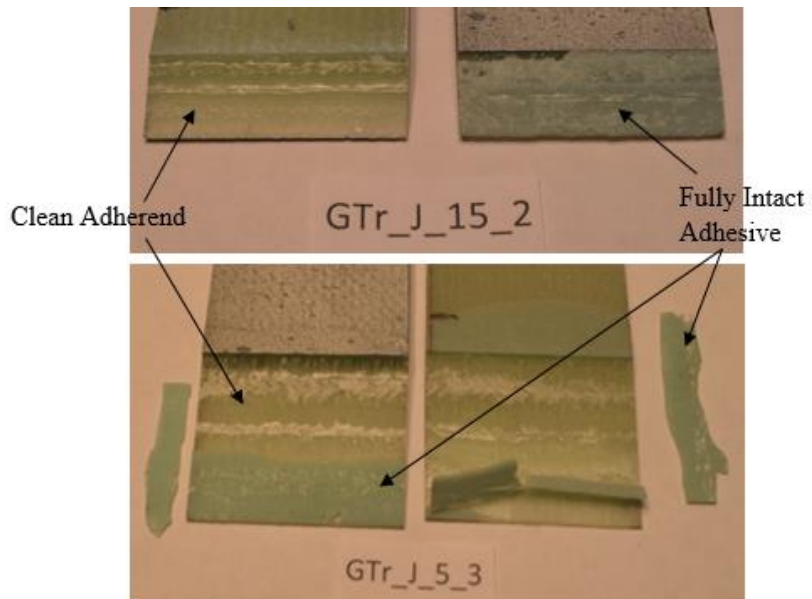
Adhesive Failures in Glass Triax (GTr) 2 inch Wide Joint Specimens
